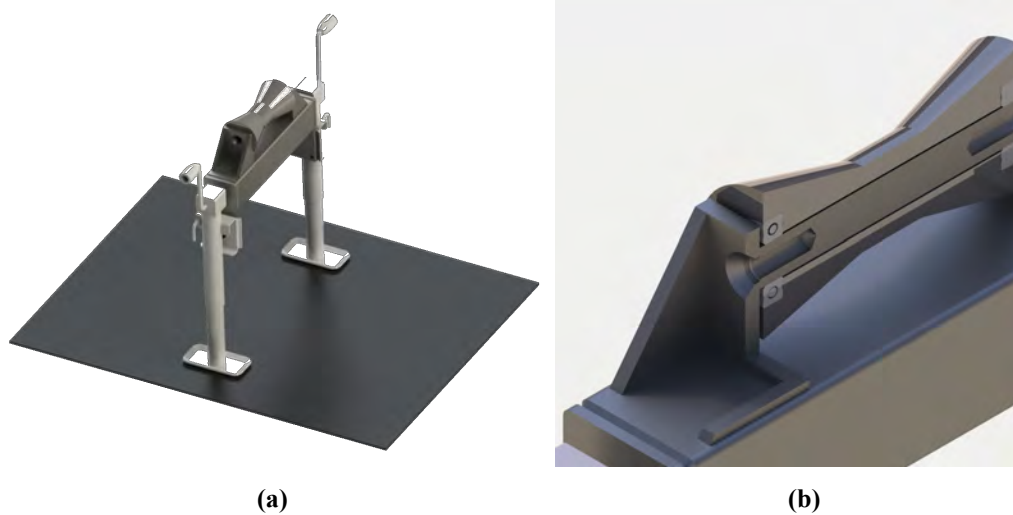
Roller stand as it is welded to its own plate, independent of the primary or secondary stands.
